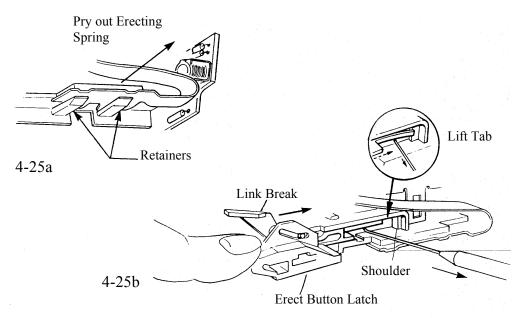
Removing Erect Spring, Button Latch & Link Break
